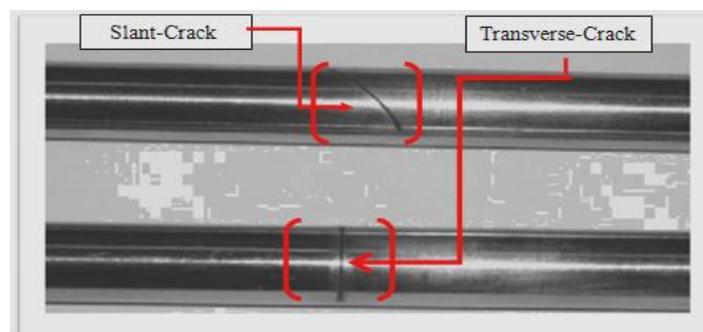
Transverse-cracked shaft and slant-cracked shafts
